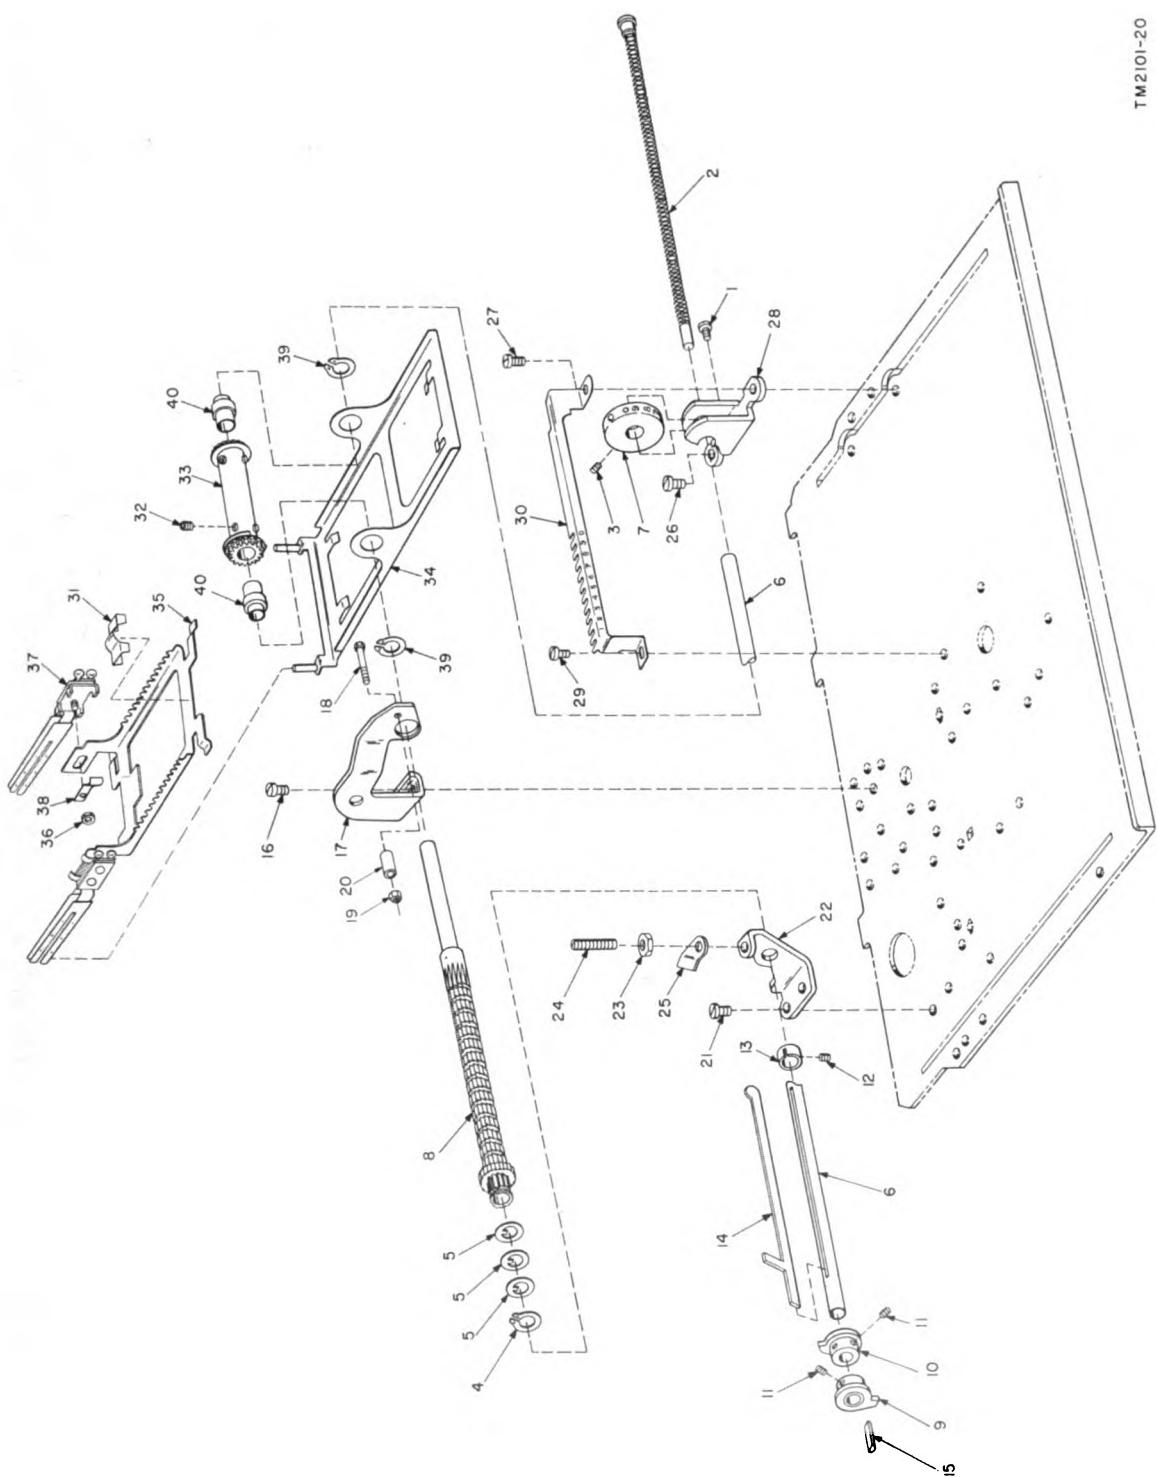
Tubular shaft, cog roller, carriage and spring wiper assemblies, exploded view.
